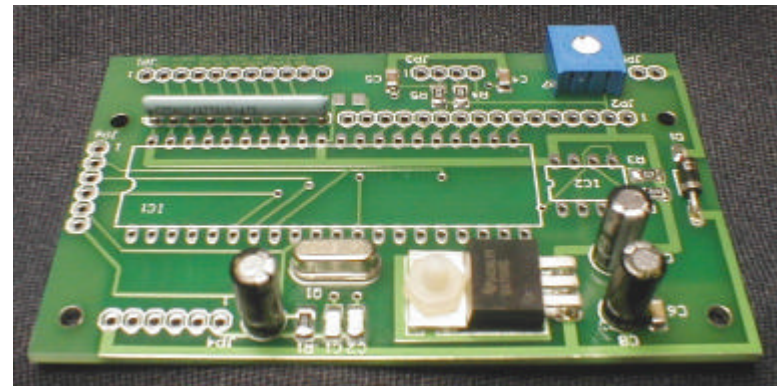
Rear view of CPU board after through-hole components have been installed. (R6 still missing -an error)
